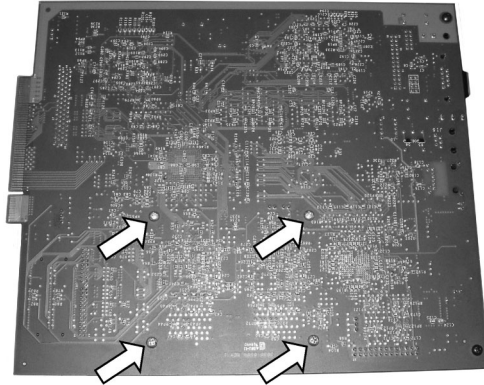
Location of M3 mounting screws (ESI-600 main board shown, without faceplate)
